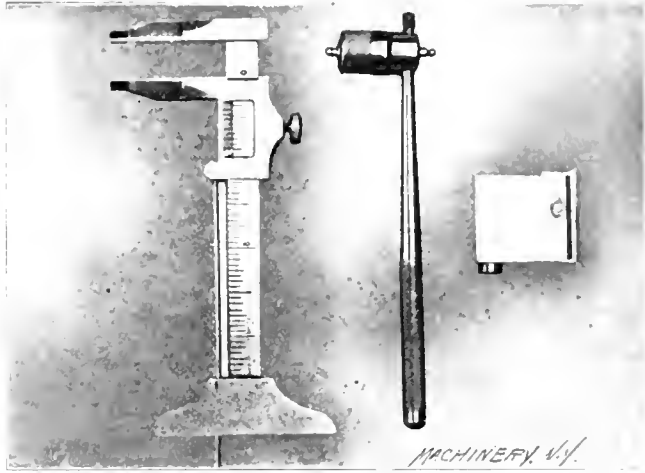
Vernier Caliper Depth Gage, Inside Micrometer, and Scribing Block.
